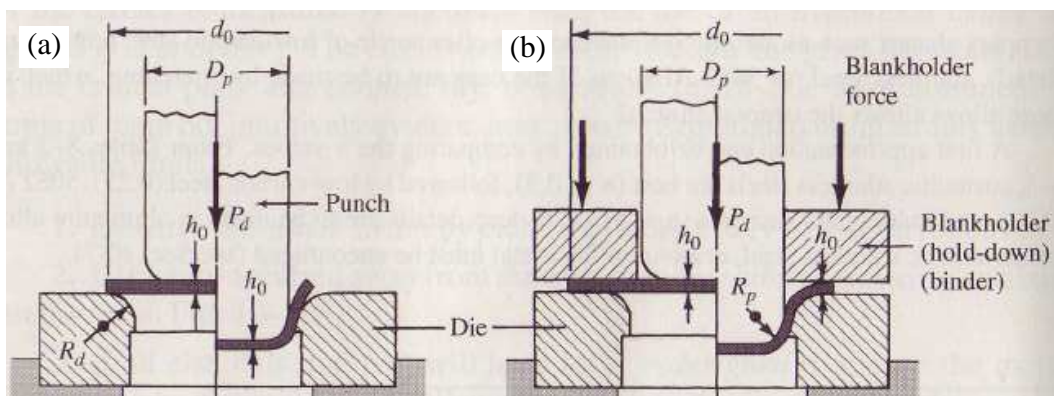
Deep-drawing process: (a) no blank-holder; (b) with blank-holder, from [8].
